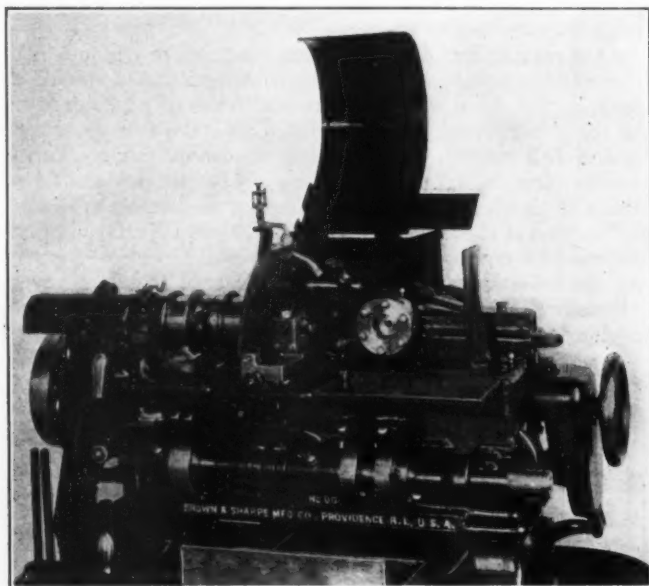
SPECIAL NO. 00 AUTOMATIC SCREW MACHINE SUITED TO HIGH-SPEED WORK
